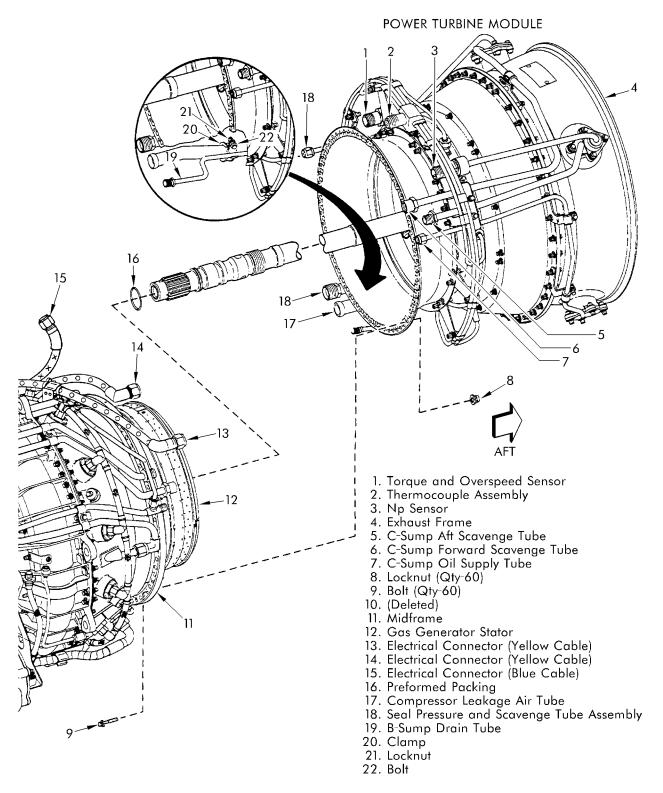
Power Turbine Module (Typical); Removal and Installation
